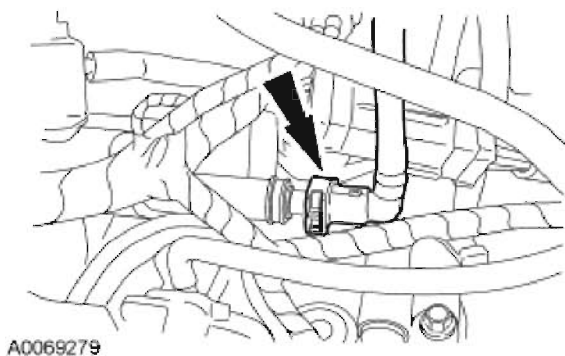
Locating Fuel Vapor Return Tube & Retainer
